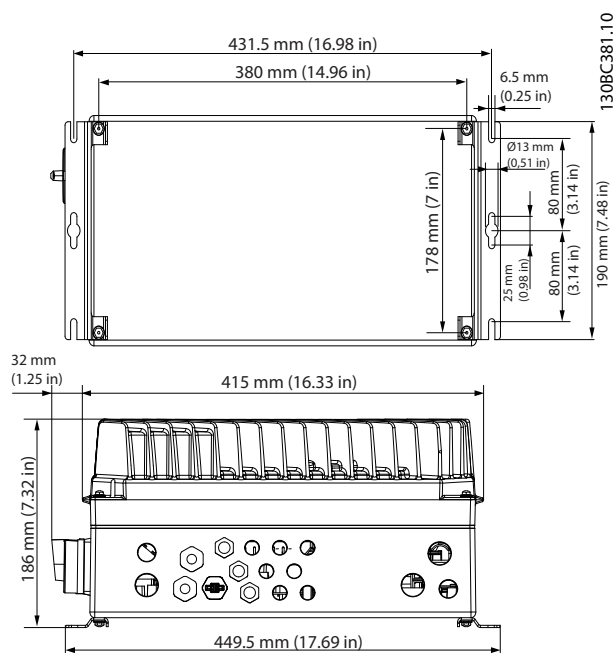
Cable Entries and Hole Sizes (Large Unit)
